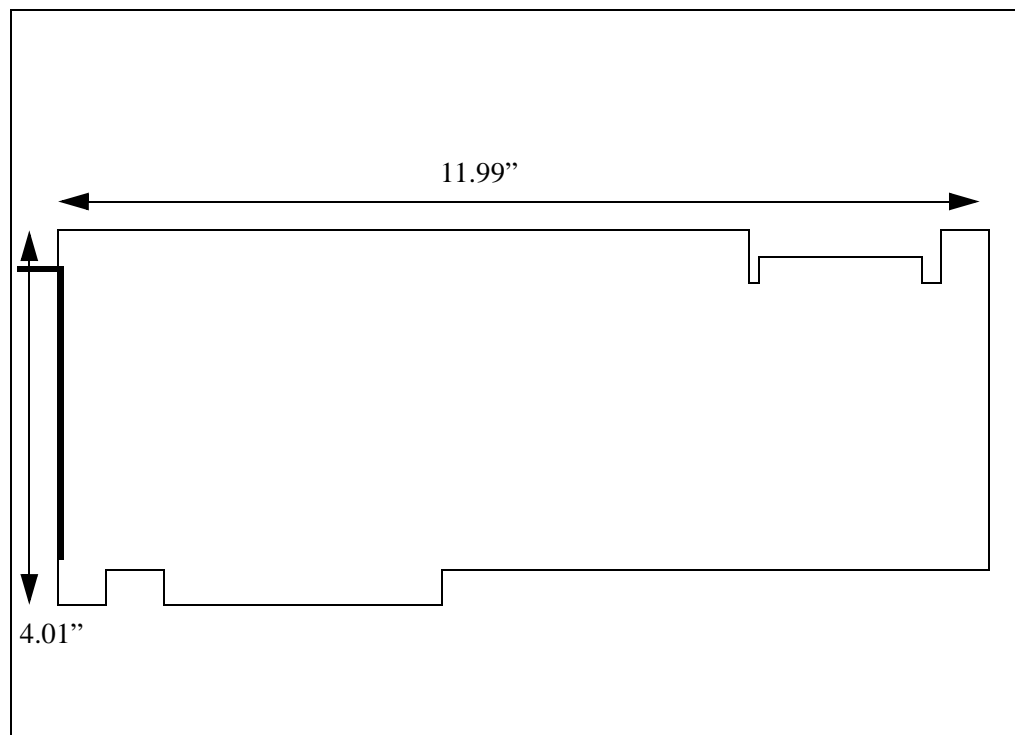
Vidar-5x16-PCI Physical Dimensions (inches).
